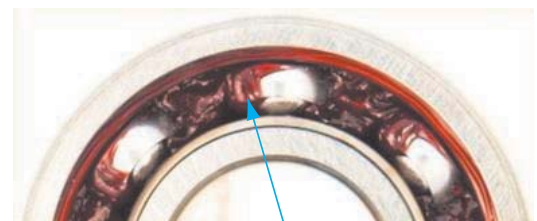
Grease deposition in bearing using narrow pocket cage (Fig. 8)
